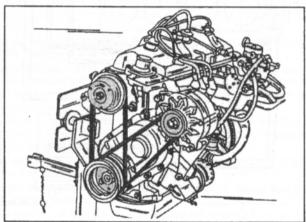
The water pump drive belt is fitted vertically between the crankshaft pulley and the water pump. The other belt drives the alternator.
